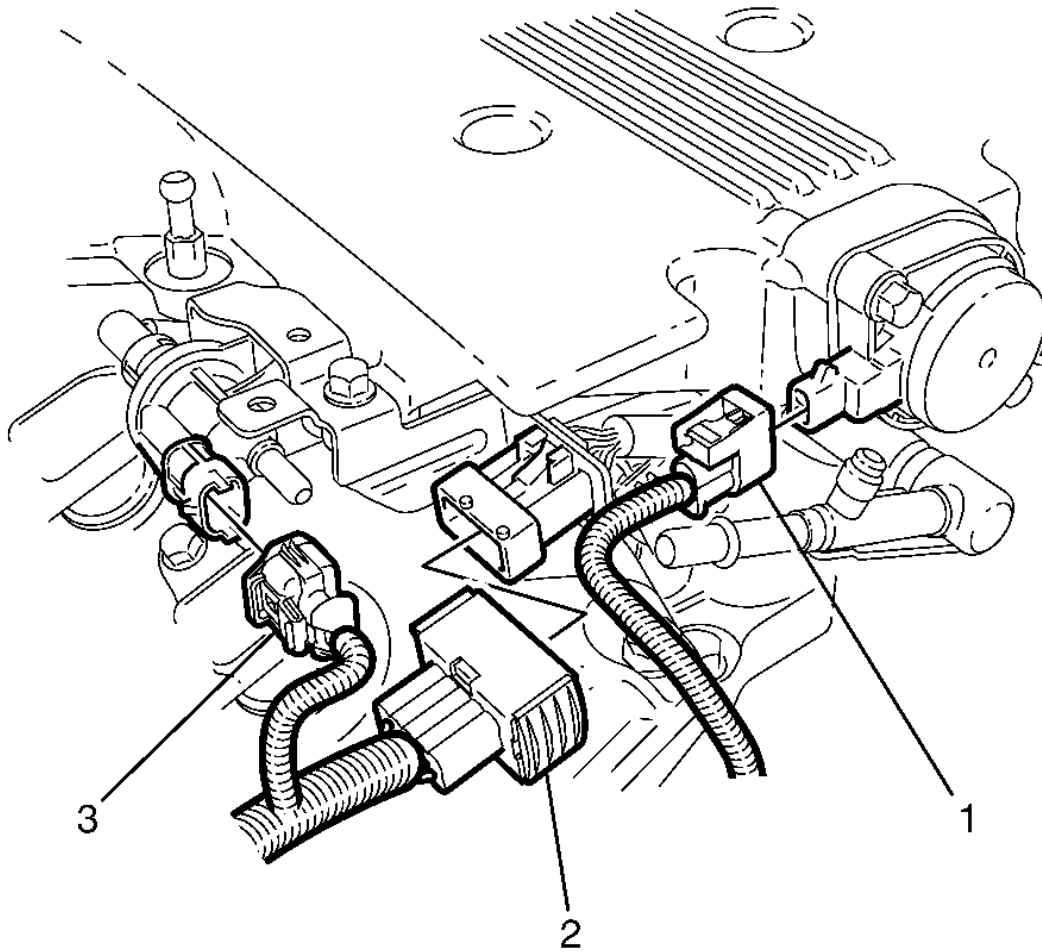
View Of Left Hand Heated Oxygen Sensor 1 Electrical Harness & Connector
